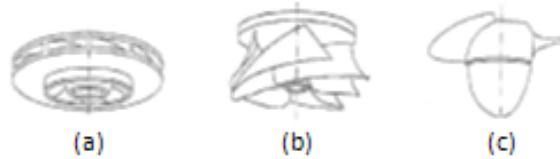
Pump impellers: (a) radial; (b) mixed; (c) axial impellers (adapted from Simão, 2009).
